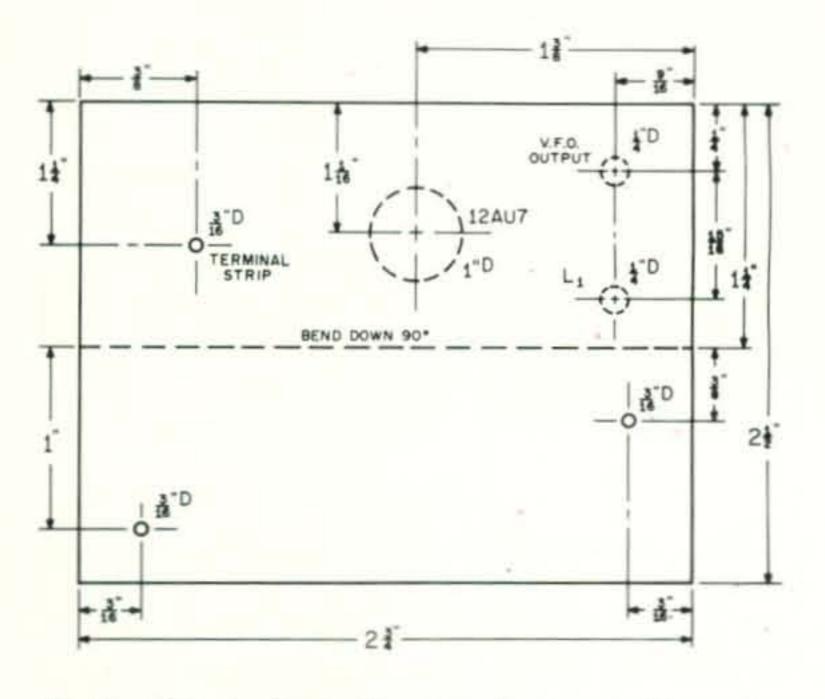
Chassis dimensions for the transmitter v.f.o. line driver mounted on the rear of the v.f.o. assembly in the 32S-1
